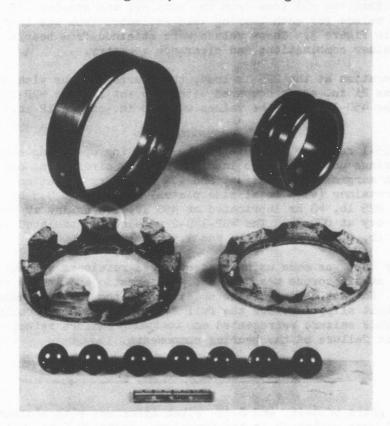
Ball Bearing With Failed RB-HP-15-1 Retainer
